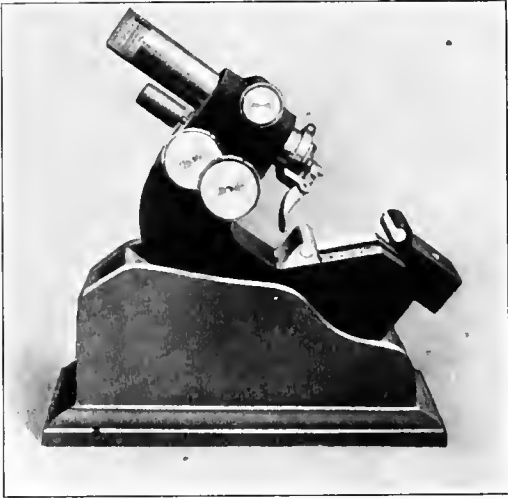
Minimeter mounted for Use on Cylindrical Surfaces
